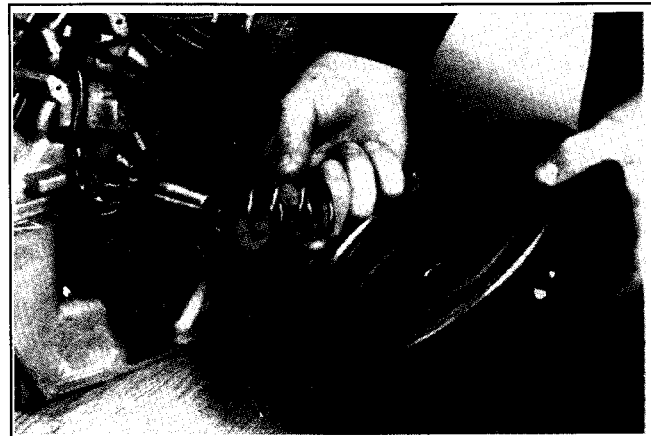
Spring Inside Will “POP” Flywheel Off.
